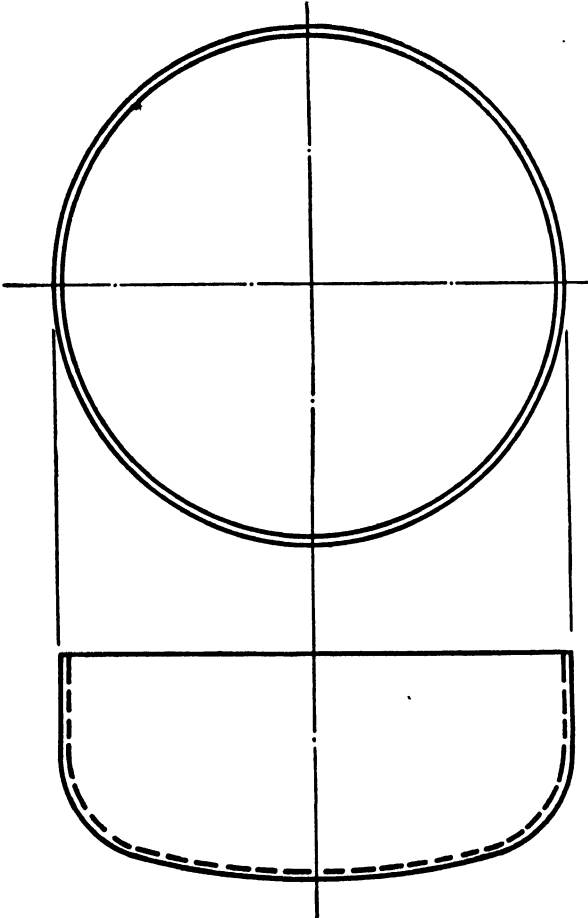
This large cylindrical shell has two different designs of dies for drawing it, each of which is illustrated and described.
